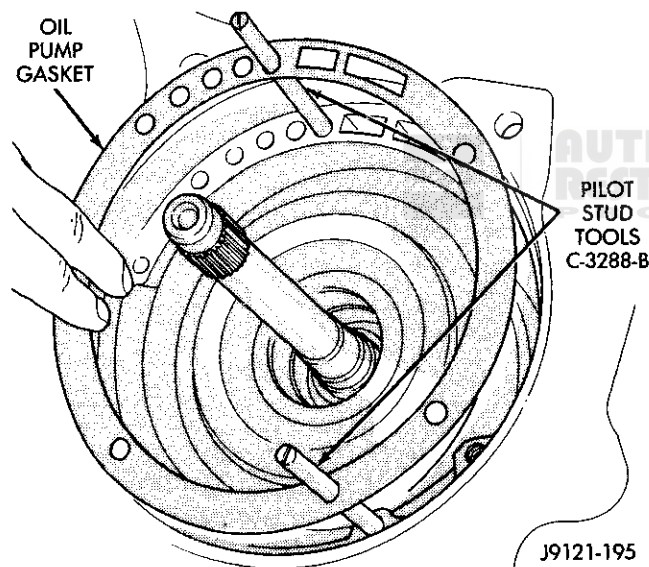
Installing Pilot Studs And Oil Pump Gasket
